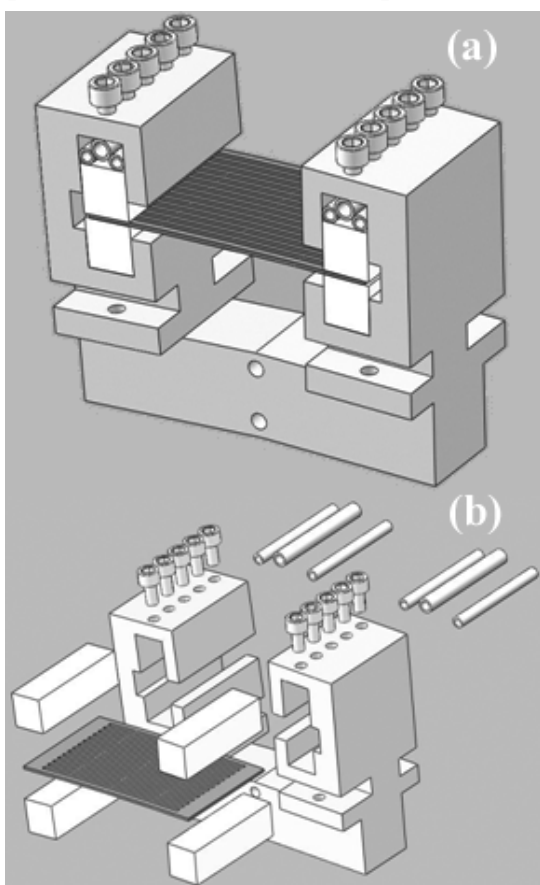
(a) schematic view of a multi-strip crystal assembled on its holder (b) an exploded view of the holder and crystal assembly.
